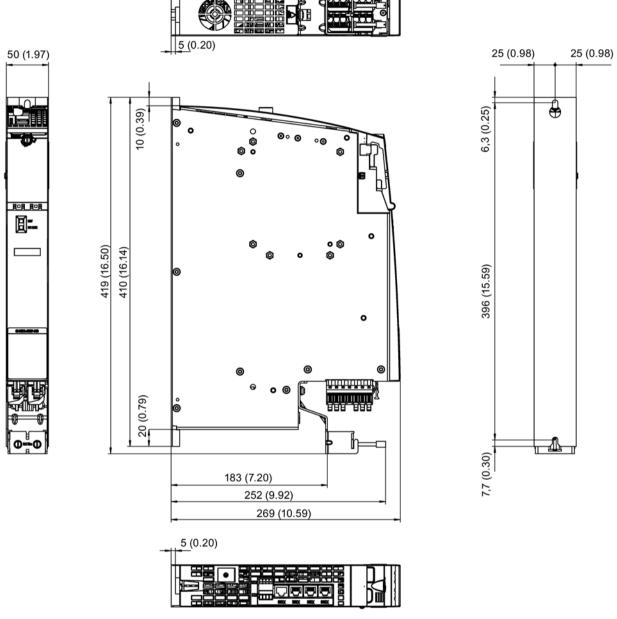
Dimension drawing of 50 mm Motor Modules in booksize C/D-type format with internal air cooling, all dimensions in mm and (inches)
